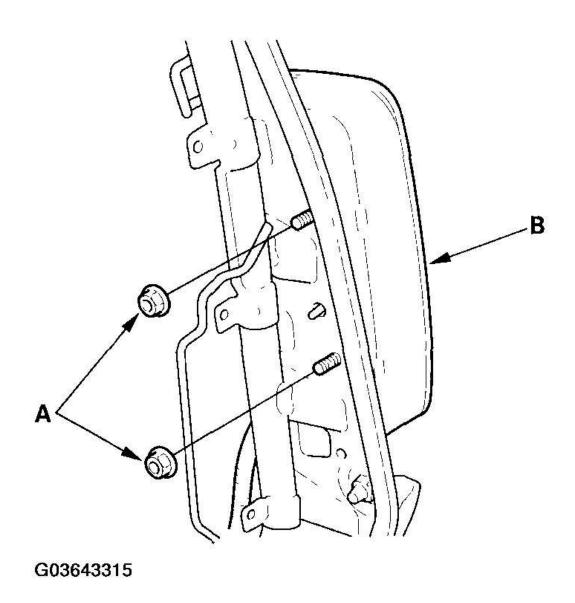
Removing Mounting Nuts And Side Airbag Courtesy of AMERICAN HONDA MOTOR CO., INC.
